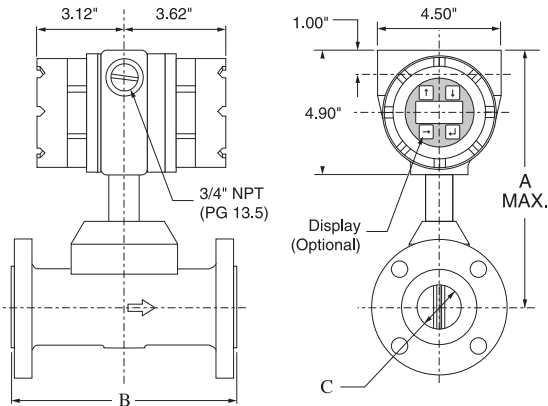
Dimensions: Flange Connection, Integral Mounting.
